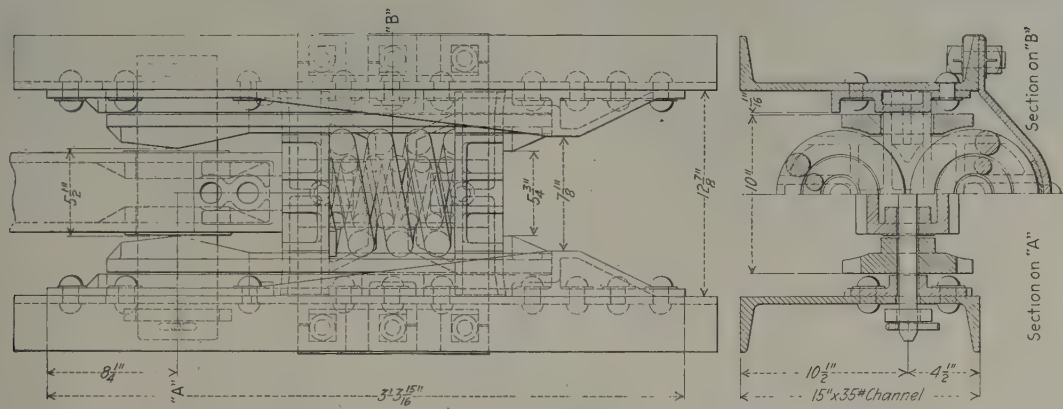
Sherman Twin Spring Draft Gear with M. C. B. Class G Springs.
